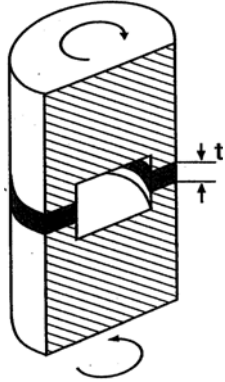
Sectional view of the Napkin Ring Test specimen; t is the bond thickness
